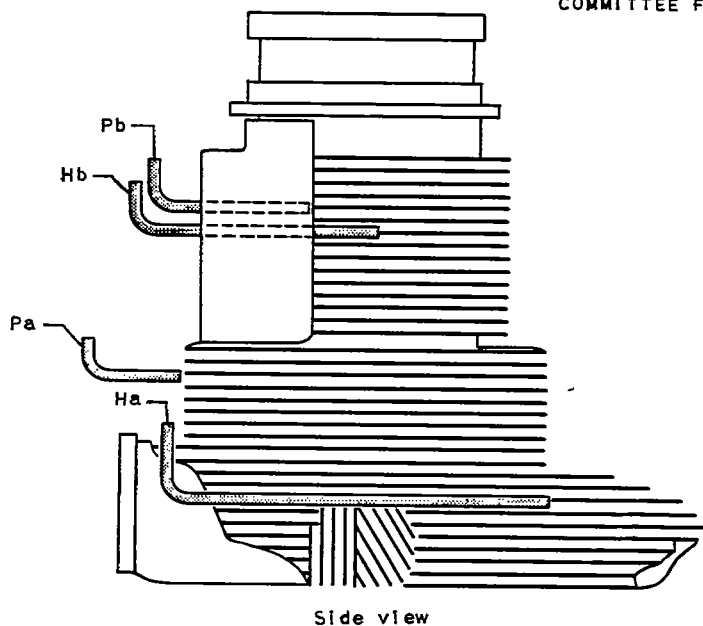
Pressure-tube installation used on in-line air-cooled engine.
